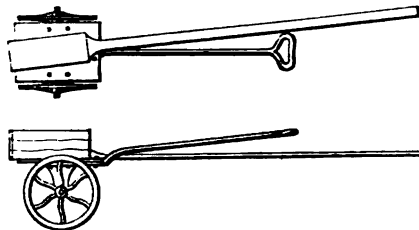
Carriage for carrying staff to the hollow fire. Plan and side elevation.
